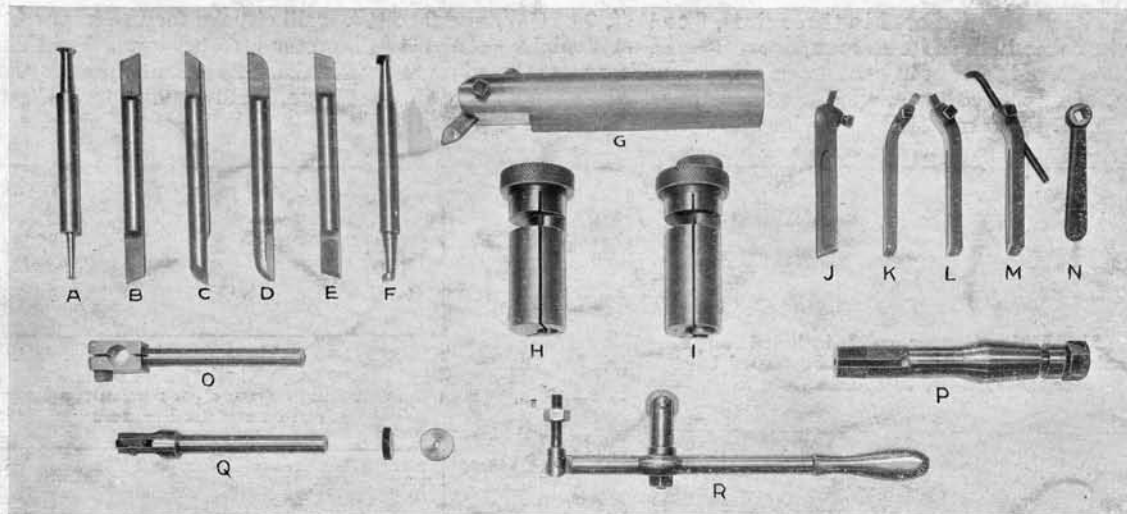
Tools and Tool Holders: A to F inc., 1/2" round for eccentric tool holder: A — internal threading; B — external threading; C — centering; D — right and left side turning; E — cutting-off; F — boring. G — bar holder for 3/16" square tool bits, used in eccentric tool holder. H — eccentric tool holder for 1/2" round tools. I — eccentric tool holder with sleeve for 3/16" or 3/8" square tool bits. J to L inc., tool holders for 3/16" square tool bits: J — straight; K — left hand offset; L — right hand offset. M — boring (3/16" round bar). N — wrench for tool holders. O — holder for internal threading tool for eccentric tool holder. P — arbor for milling attachments. Q — knurling tool for cutting-off and forming slide.
